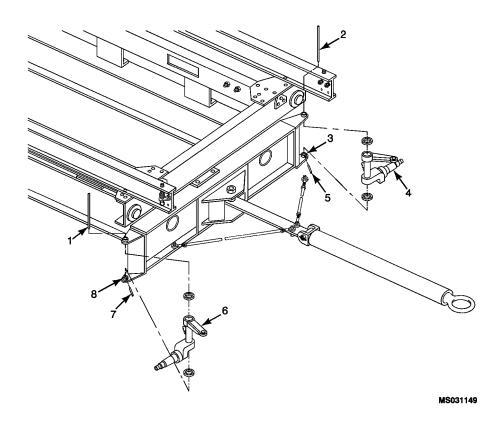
LH and RH Axle and King Pin Pivot Assemblies – Exploded View.
